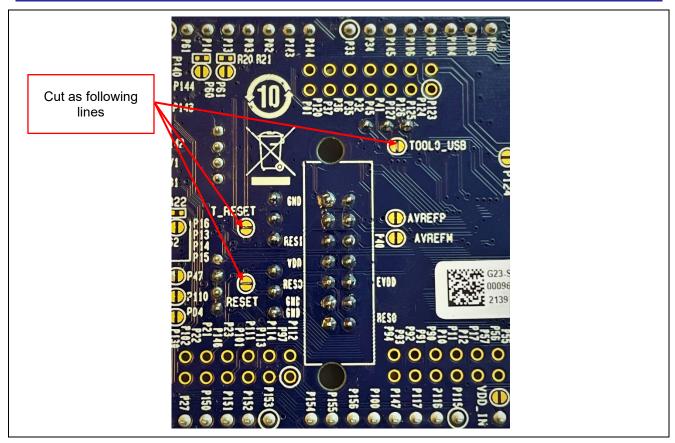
RL78/G23-128p Fast Prototyping Board after soldering (Soldered Side)
